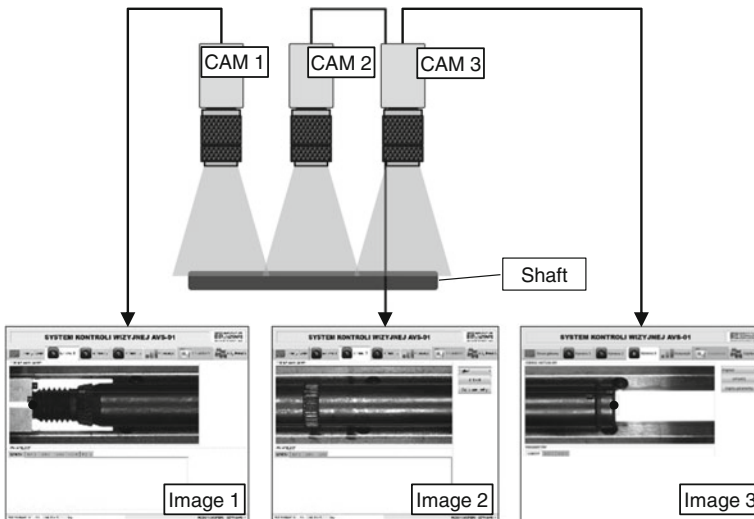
Scheme of the multi camera vision system for the inspection of shafts
